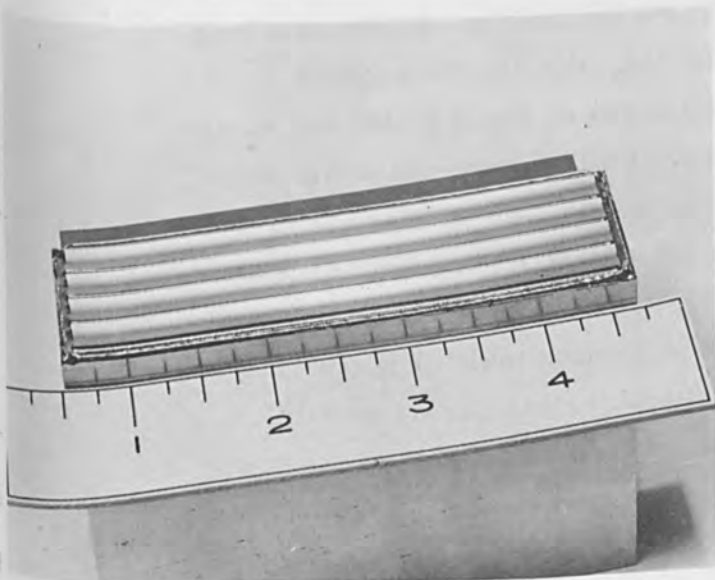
Welded 1-1/4 x 4 in. multistrip ionizer
